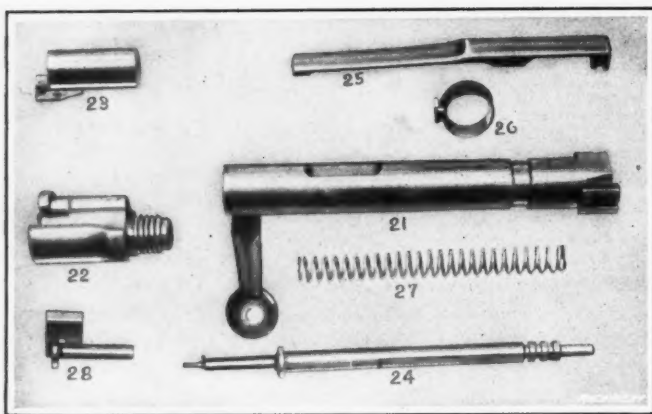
Mauser Rifle Bolt, Plug, Cocking-piece, Safety Lock, Extractor, Extractor Collar, Main Spring and Striker
